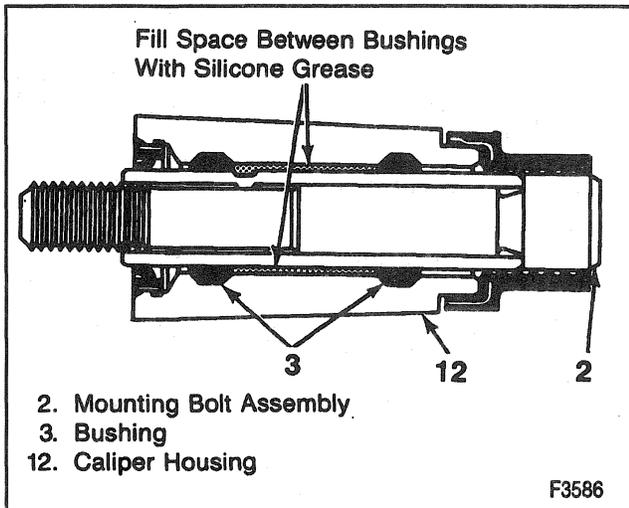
Mounting Bolt Lubrication (Delco 3400)
